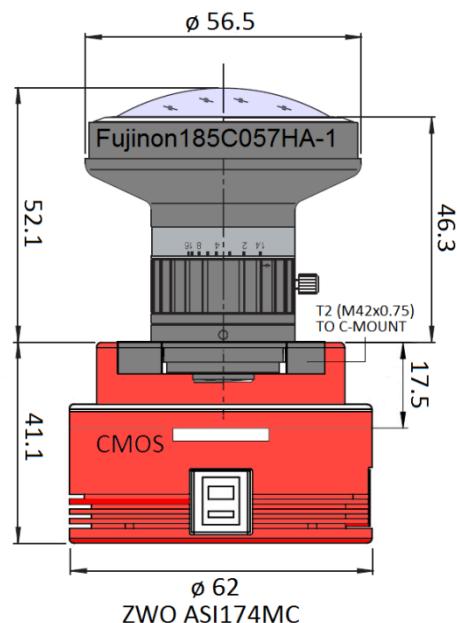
Drawing of the ZWO ASI174MC camera head and the Fujinon F/1.4 all-sky lens. All measurements are in mm.
